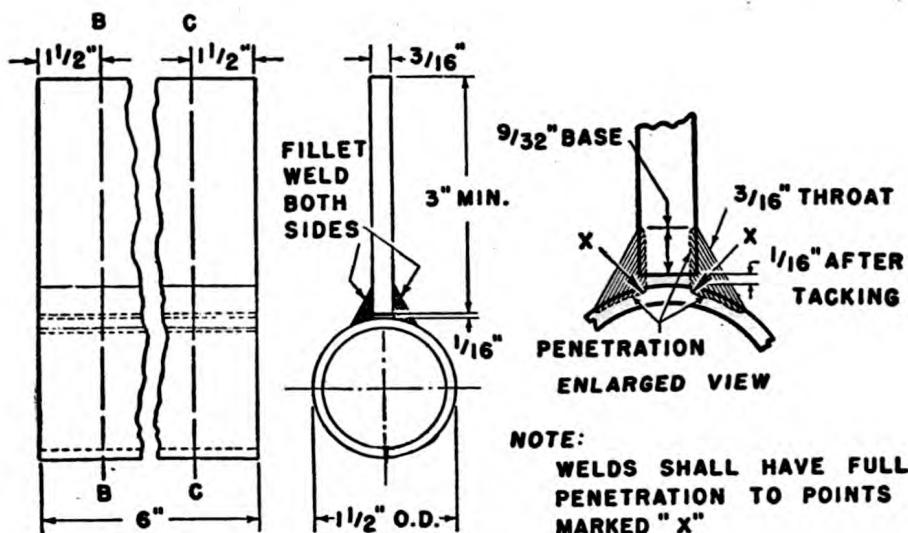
Weld joining plate and tubing made in horizontal position.
